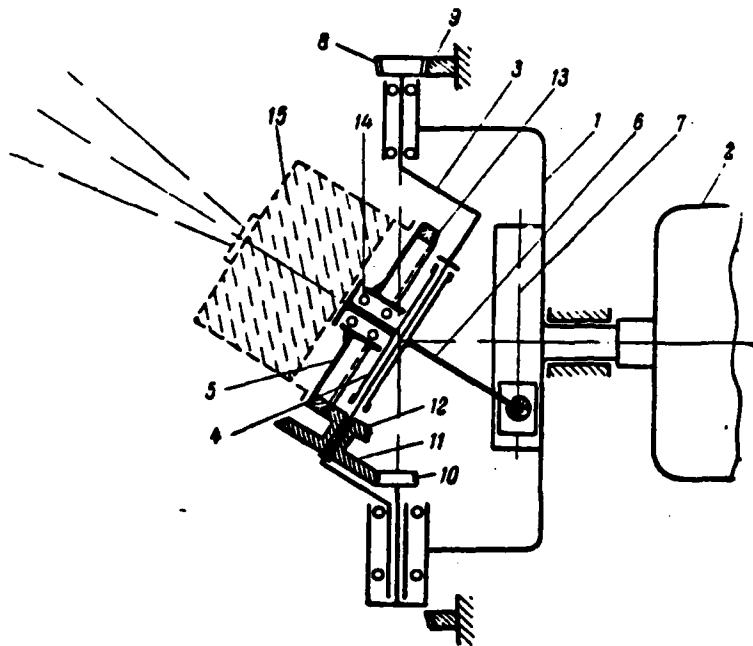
Scanning device/equipment, created on the basis of a three-dimensional-spherical mechanism, with the retention of the scanning platform from the rotation.
